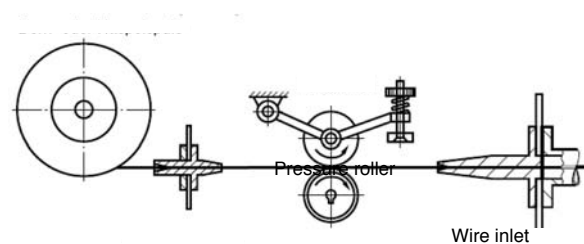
Inserting the welding rod reel and wire guide
